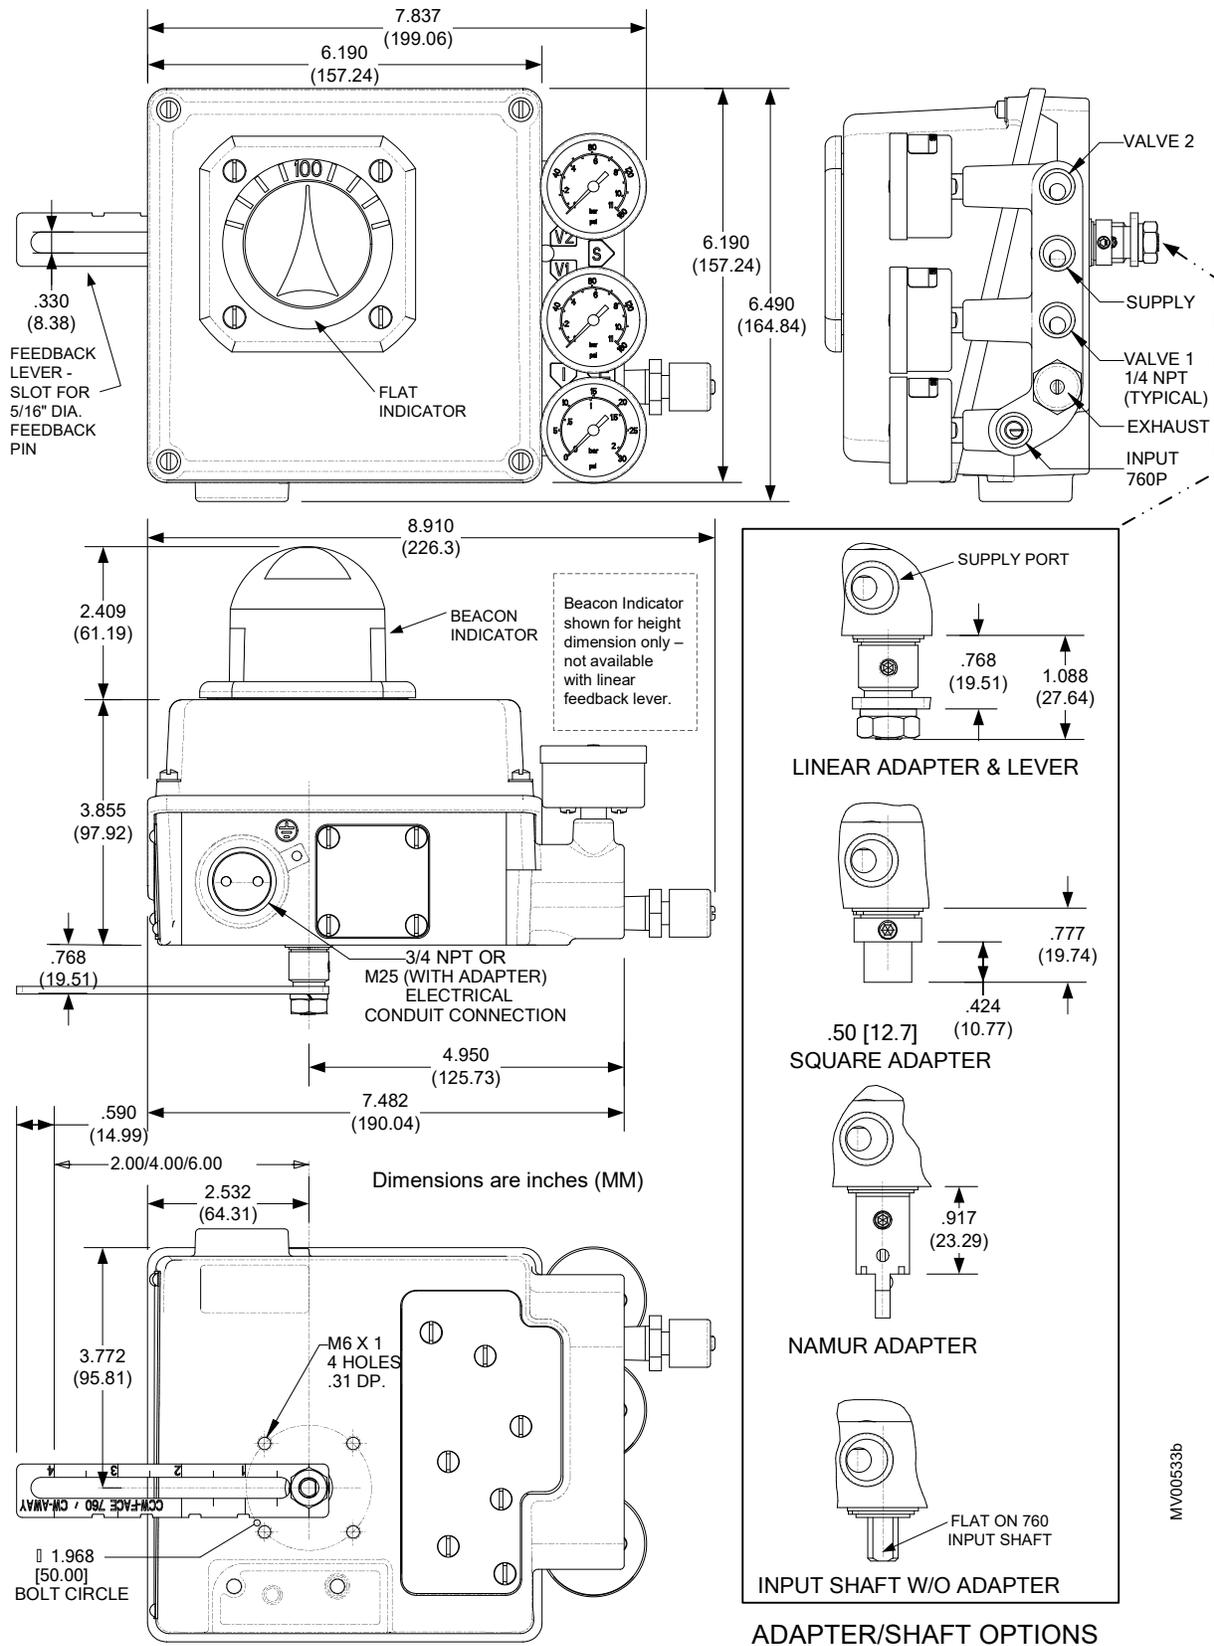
Installation Dimensions and Adapter/Shaft Options, Design Level D
